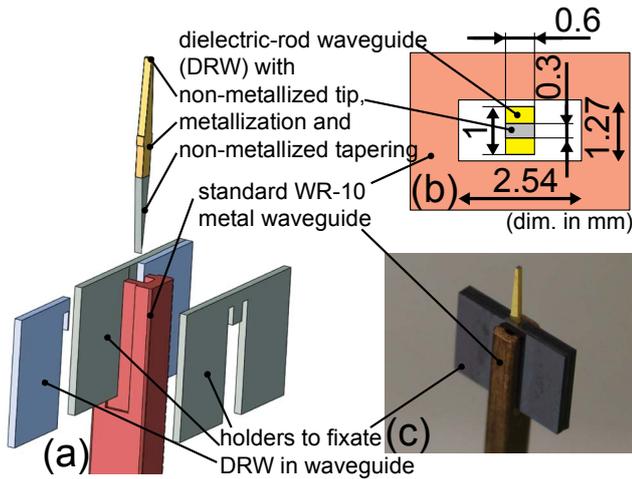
Design of the dielectric-rod probe and its fixture in a standard metal waveguide: (a) exploded CAD drawing; (b) schematic top view; (c) photograph of fabricated device.
